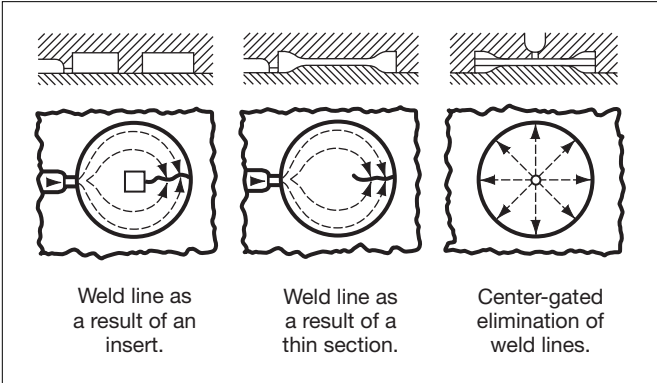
shows how weld lines are formed and how they can be prevented. When weld lines are unavoidable, place the gate close to the obstruction forming the weld line – to maintain a high melt temperature and ensure a strong weld.
